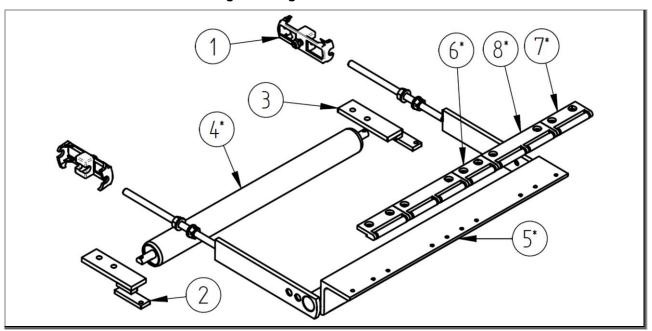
Parts list: Multi-tech rolling knife edge Ø16/Ø08 – ZZ.800.0171.00/ZZ.800.0172.00
